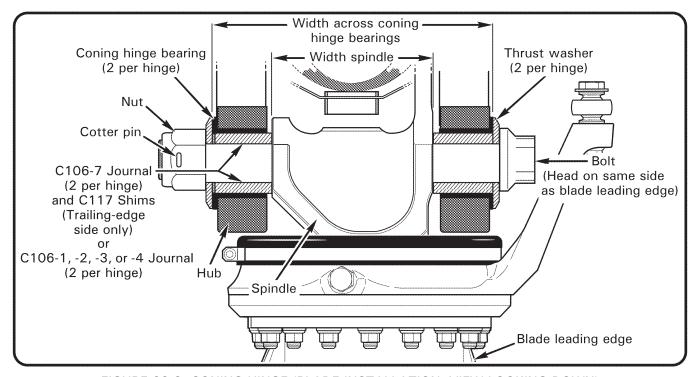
CONING HINGE (BLADE INSTALLATION; VIEW LOOKING DOWN)
